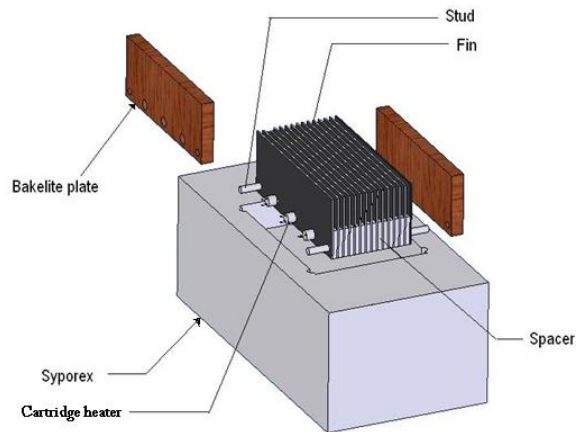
Fin array assembly is mounted inside the cavity Of syoporex block
